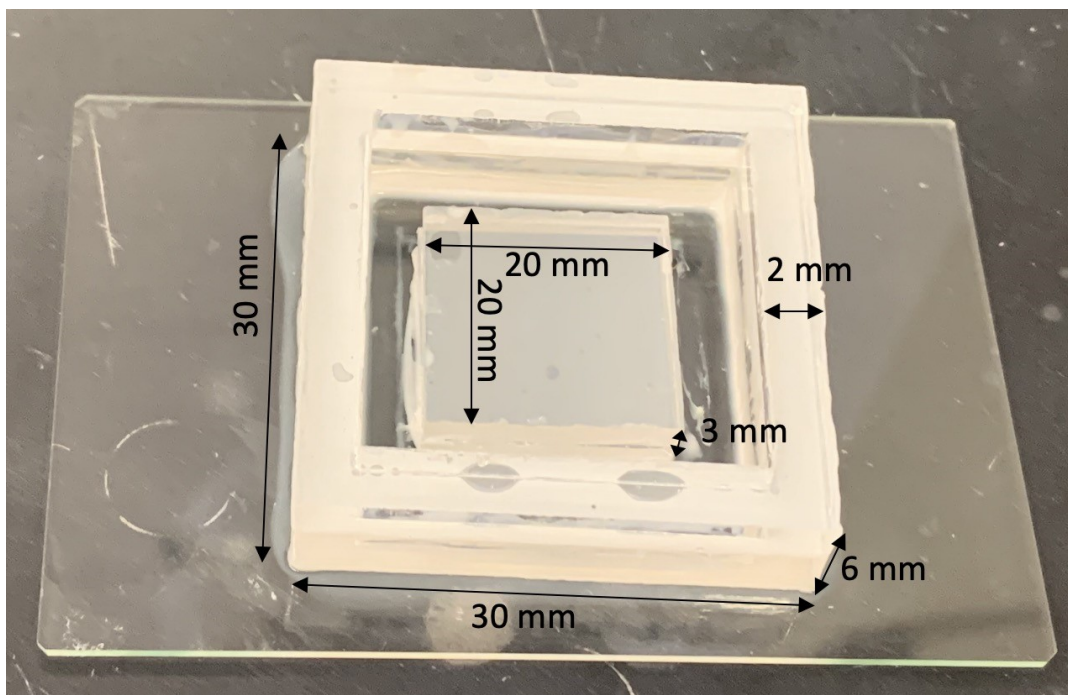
Photo of the mold built by gluing laser-cut Plexiglas boards on a glass substrate at a tilted angle.
